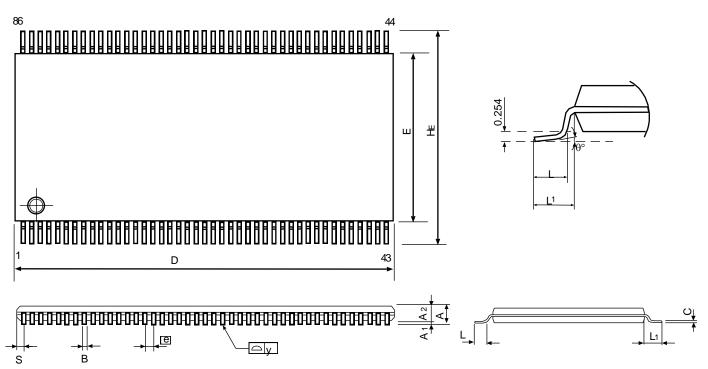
86 Pin TSOP II Package Outline Drawing Information
